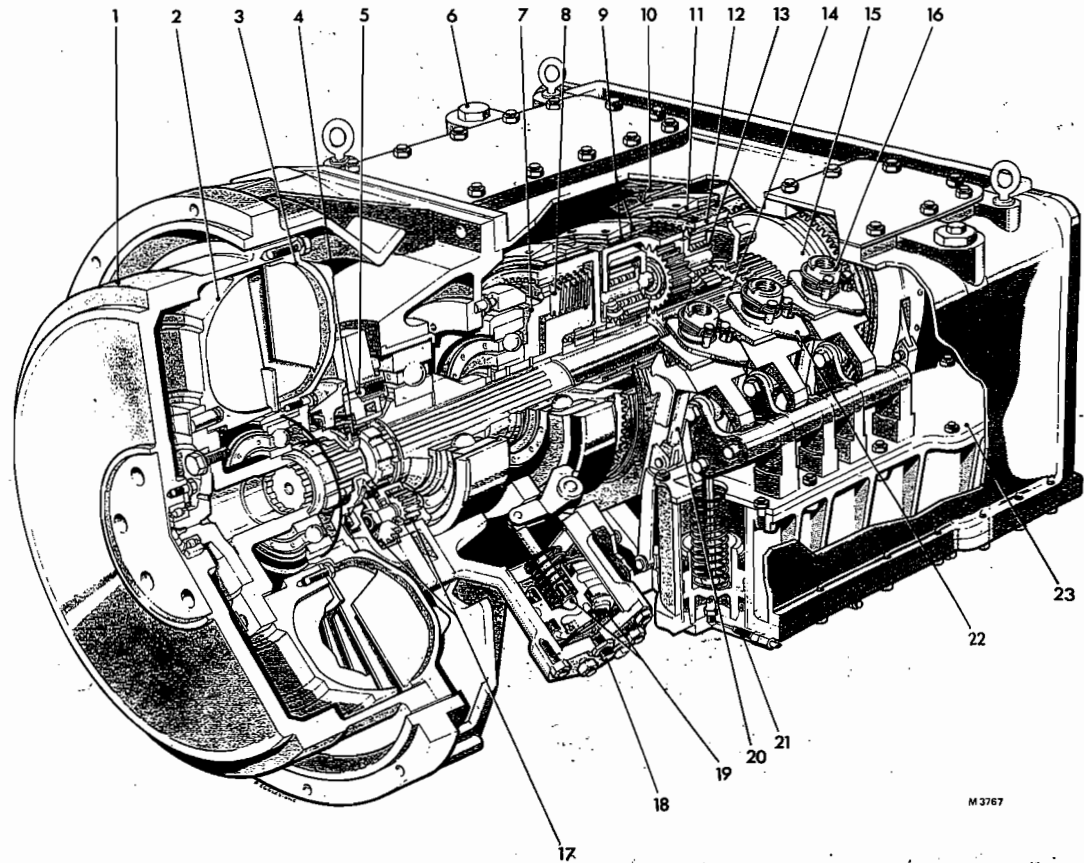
CUT AWAY VIEW OF THE GEARBOX
